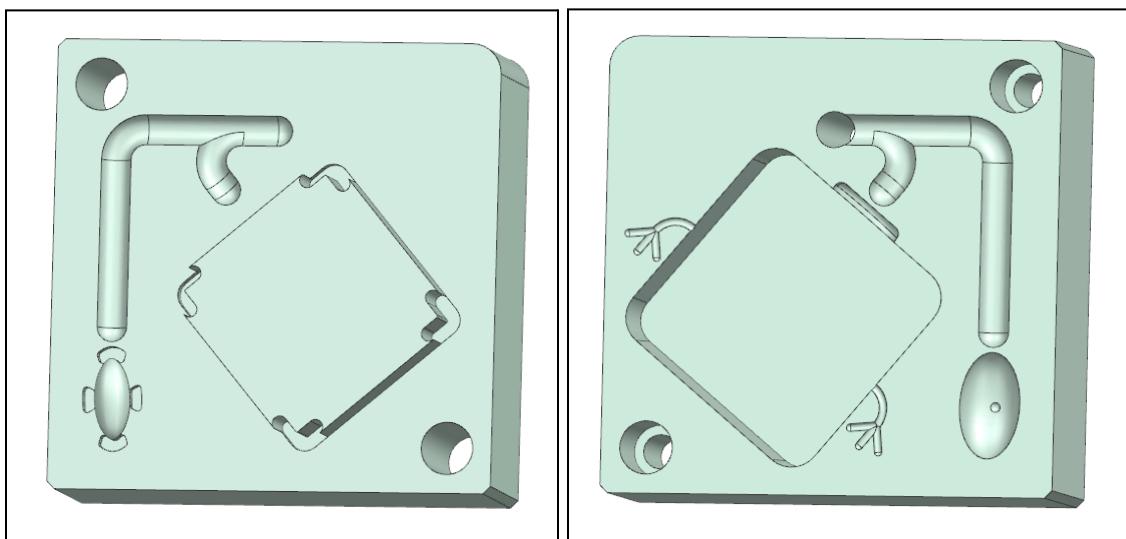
CAD model of molds for bottom core (left) and bottom cavity (right) showcasing runner designs.
